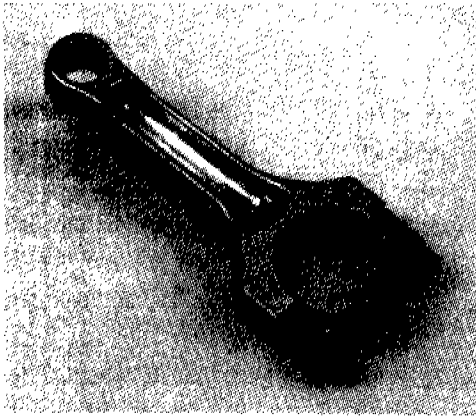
A hot-forged 2080Al/SiC/15p connecting rod
